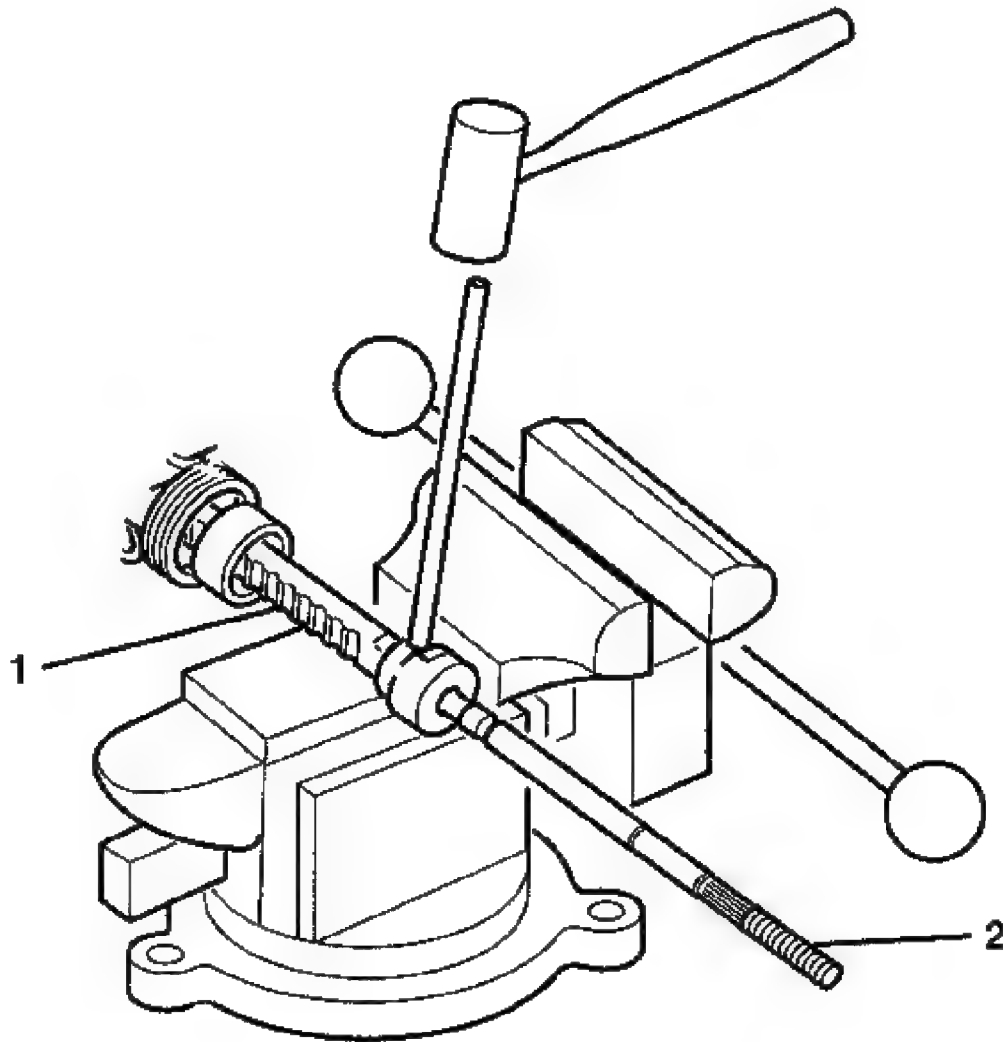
Staking Both Sides Of Female Inner Tie Rod Assembly Housing To The Male Rack
